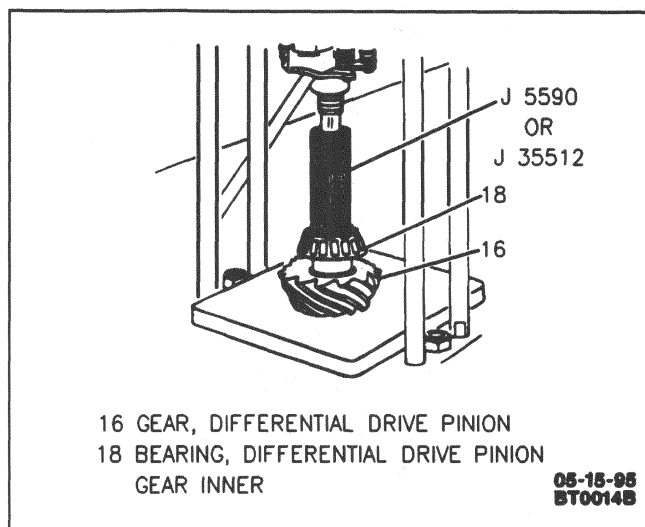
Installing Differential Drive Pinion Gear Inner Bearing
